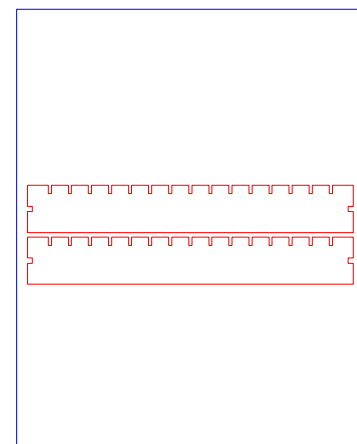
AutoCAD drawing of the side pieces of the computer cover
